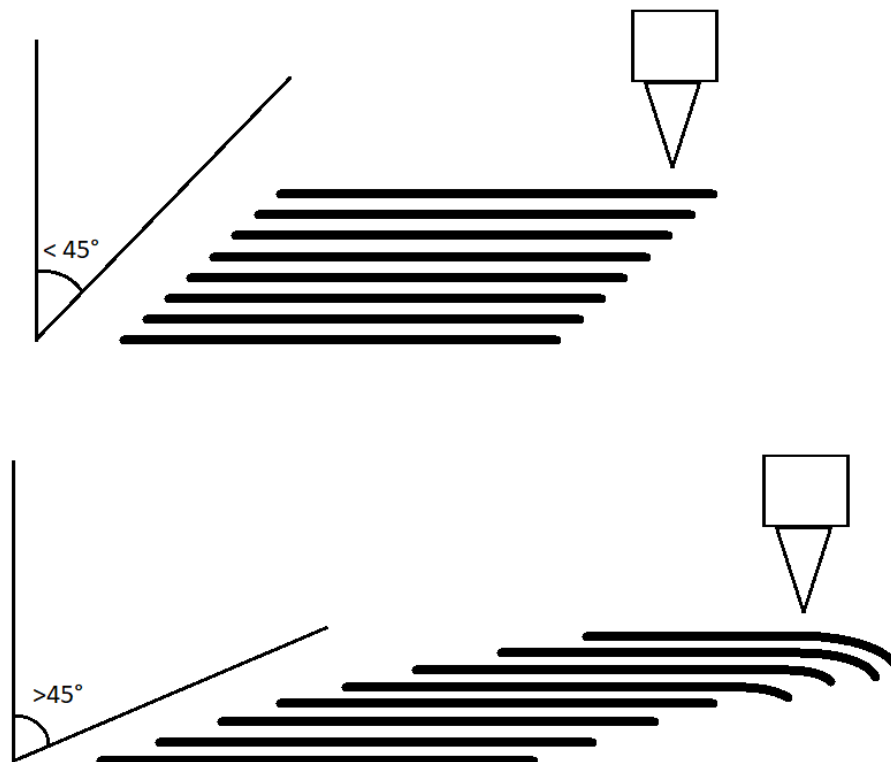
, illustration of low amount of empty space (above) and high amount of empty space (below)
